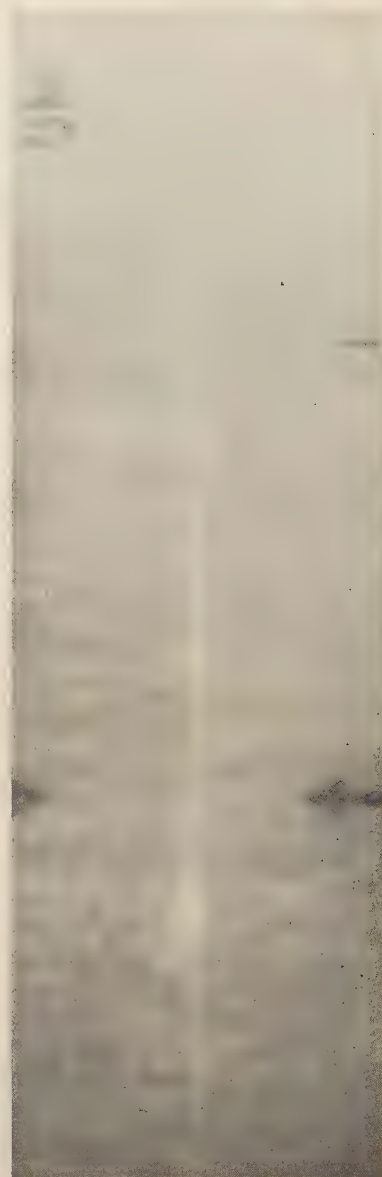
Portion of Radiograph Positive from Butt Weld on 1 1/2-in. Mild-Steel Plate, showing central crack.
